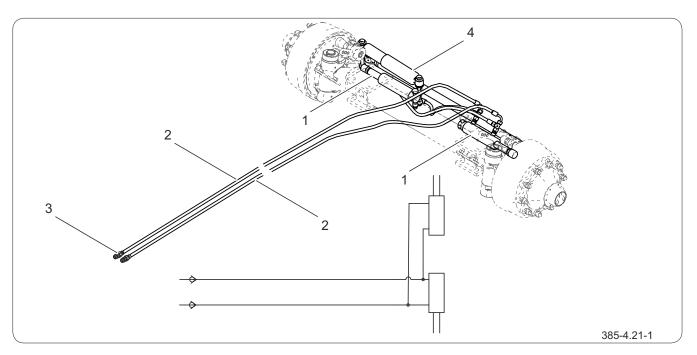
Construction and diagram of the hydraulic installation of the rear axle steering lock (1) steering lock cylinder (2) hydraulic hose (3) hydraulic quick coupler (4) shock absorber
